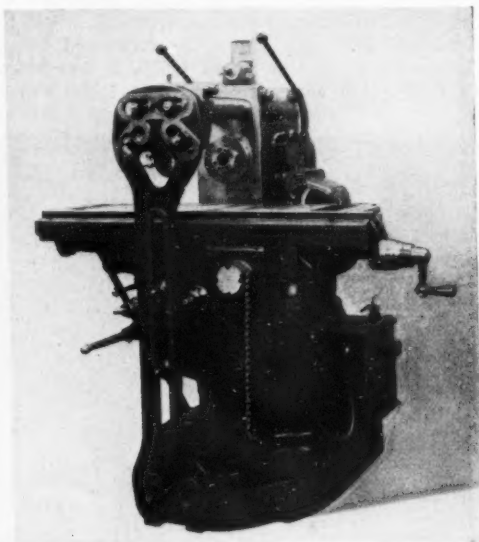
Archdale 20-in. Horizontal Milling Machine which can be Set to Perform a Single or a Repeating Automatic Table Cycle
